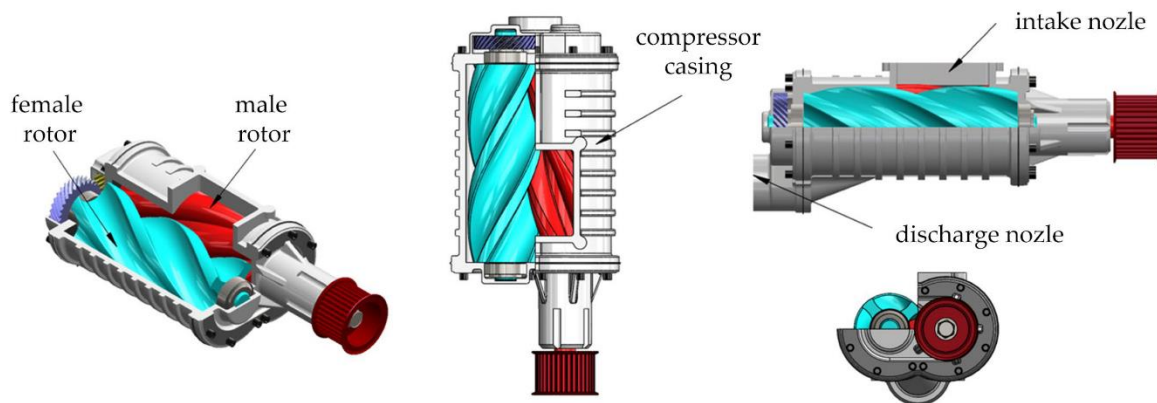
Standard layout of a twin screw air compressor with corresponding parts
